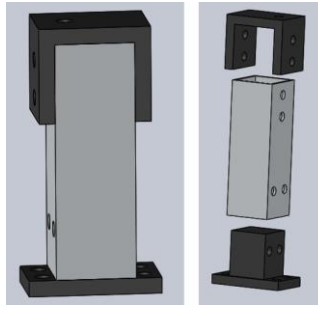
3D Model of Bearing Holder Supports in Assembled and Exploded Views
